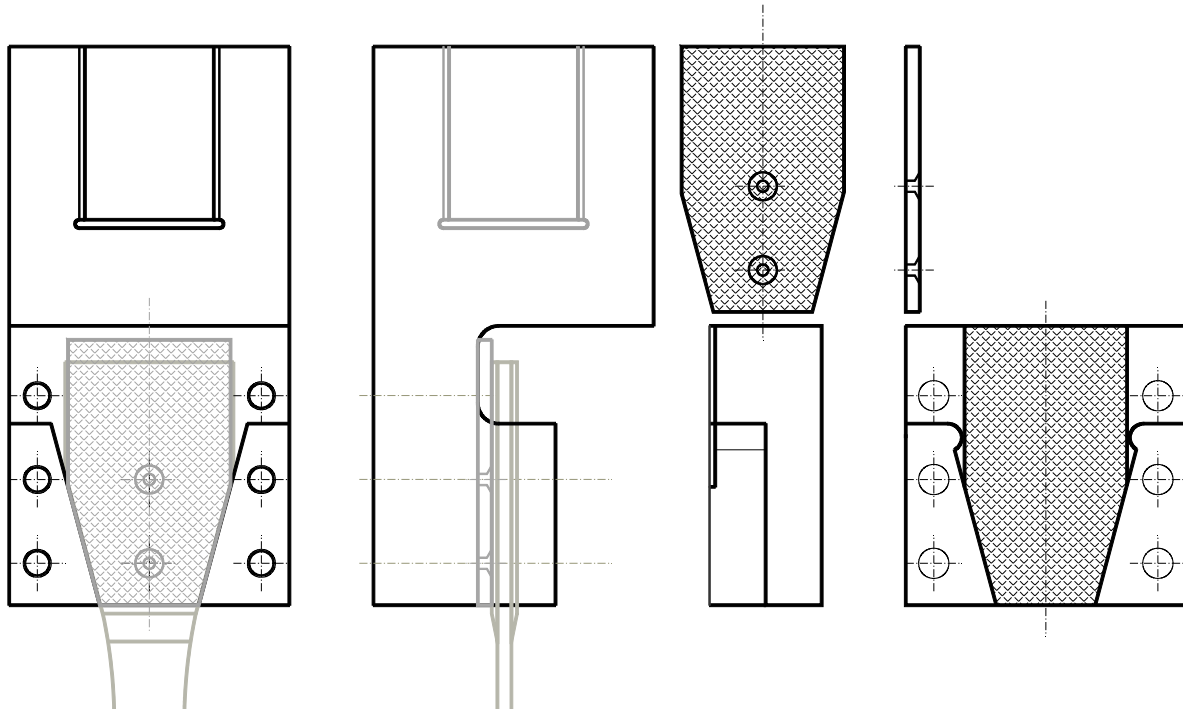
Fatigue fixture used for compression tests. Setup-2.
